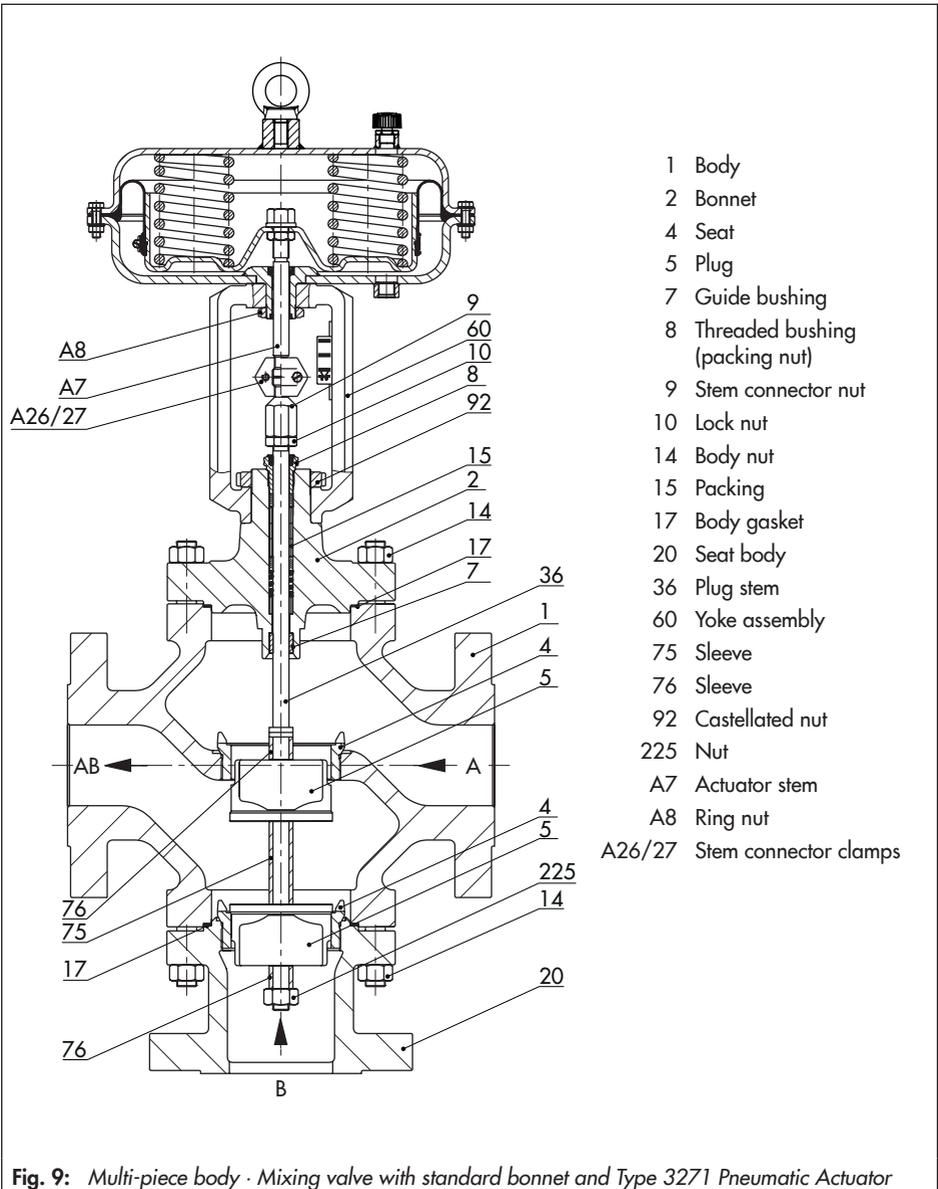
Multi-piece body · Mixing valve with standard bonnet and Type 3271 Pneumatic Actuator
